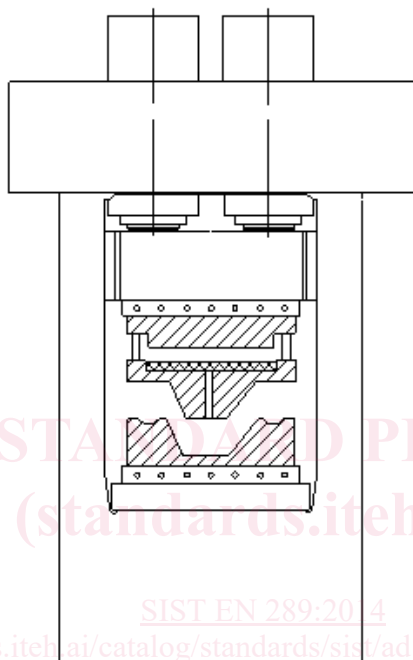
Press for transfer moulding shown with moulding material in transfer cavity
